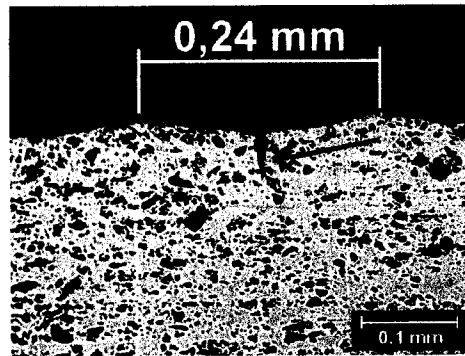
Section profile of a Al/SiC 10% specimens, machined at a feed rate of 0.24 mm/rot, taken from a region next to the fatigue fracture. The arrow indicates a fatigue crack at the machining root.
